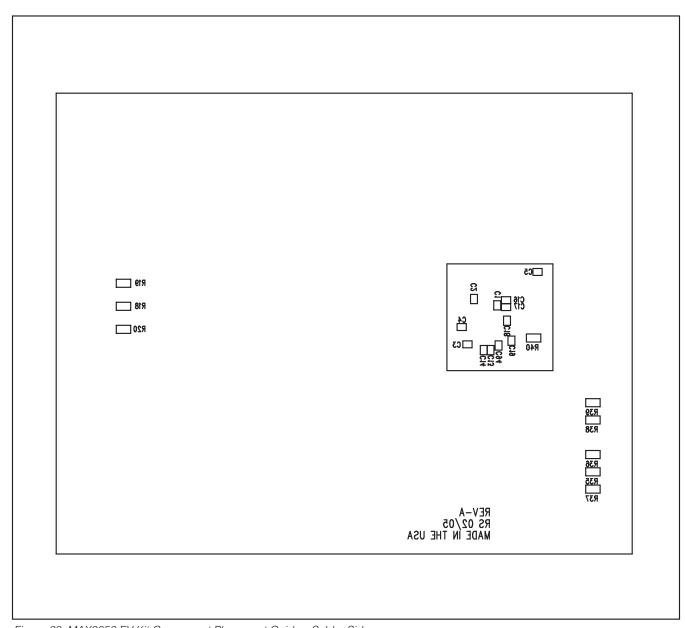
MAX9853 EV Kit Component Placement Guide—Solder Side
